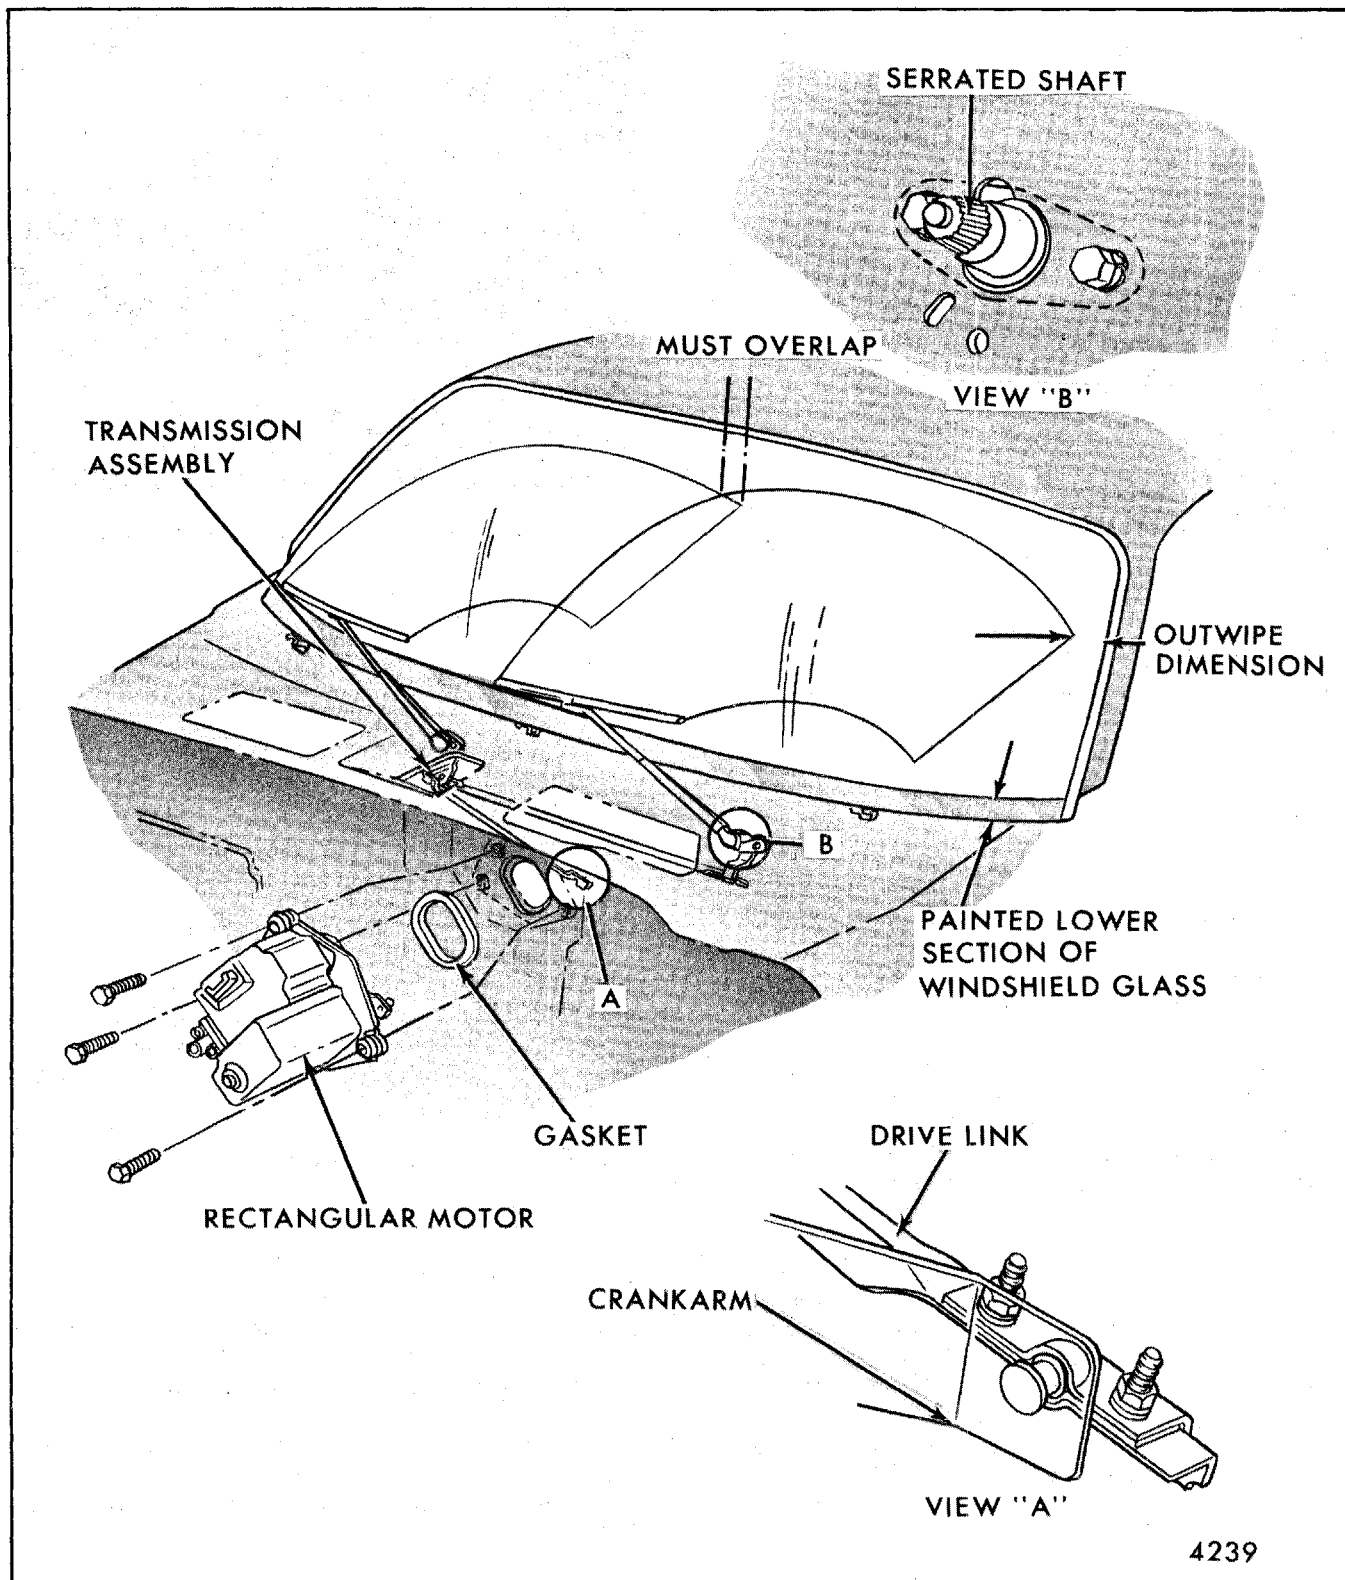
Wiper Installation and Wipe Pattern - "F" Styles
